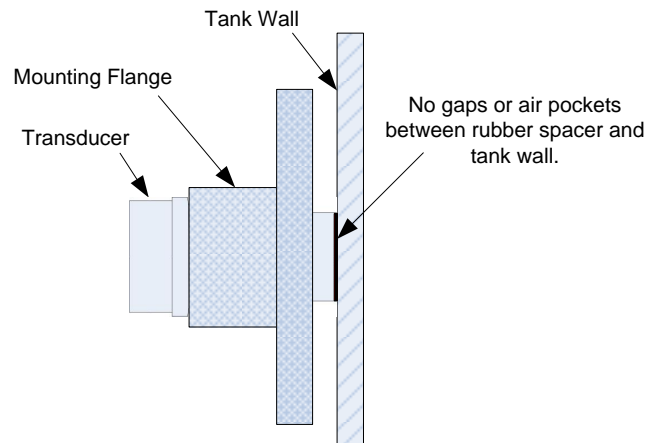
A correctly installed Level Switch with no gaps or air pockets between the rubber spacer and the tank wall.
